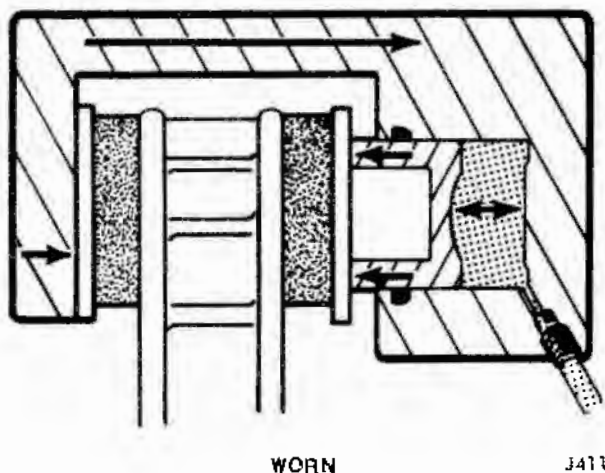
Cross-Section of Caliper Cylinder and Piston
